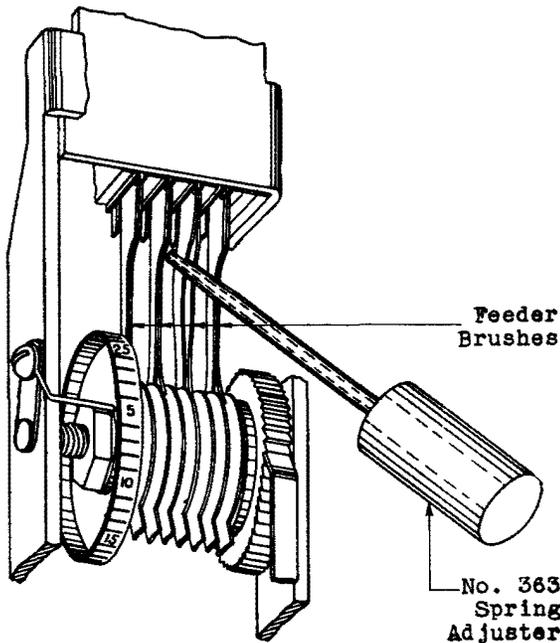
Method of Adjusting for Feeder Brush Closure
